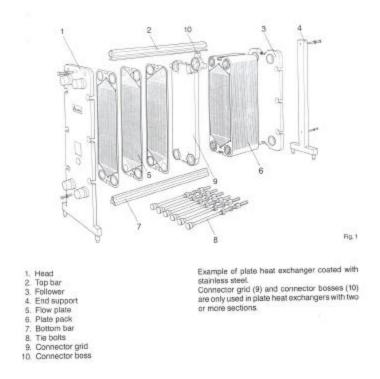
Exploded View of a 'Food Style' Plate and Frame Heat Exchanger (Courtesy of APV)
